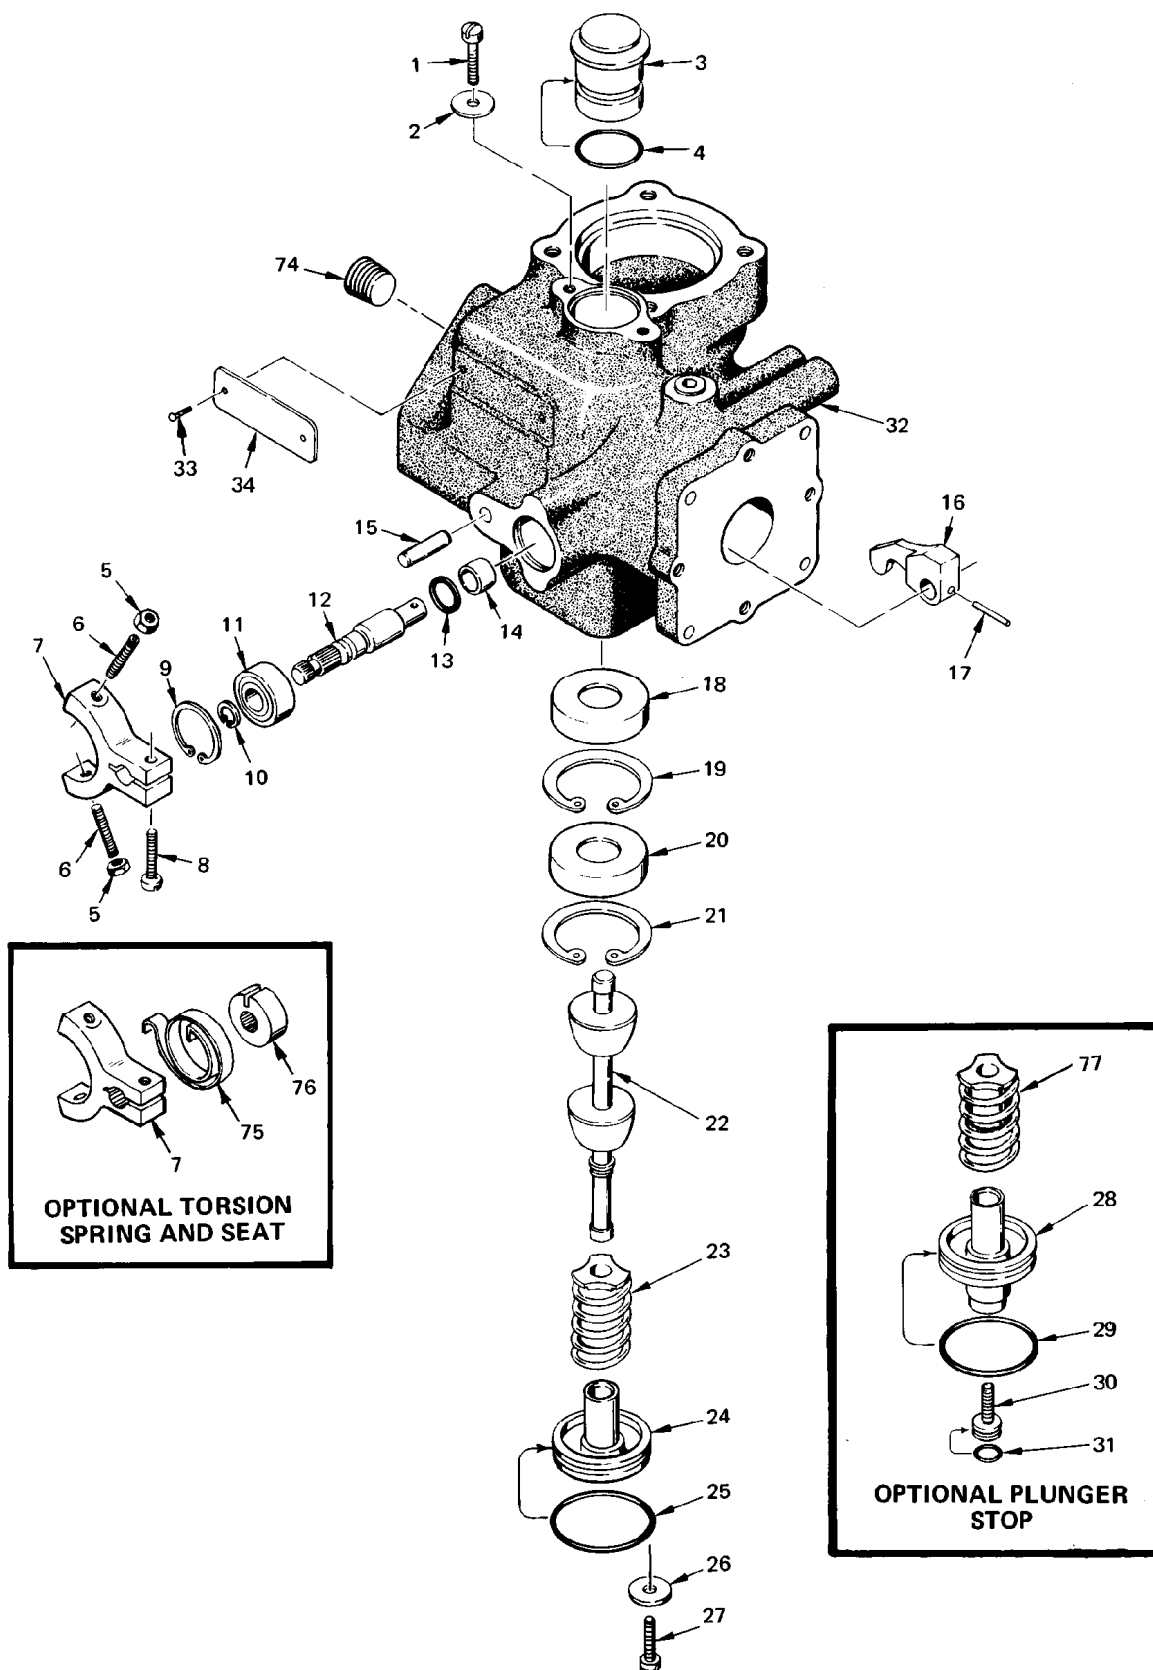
Exploded View of Gaseous Fuel Valve/Limiter (sheet 1 of 2)
